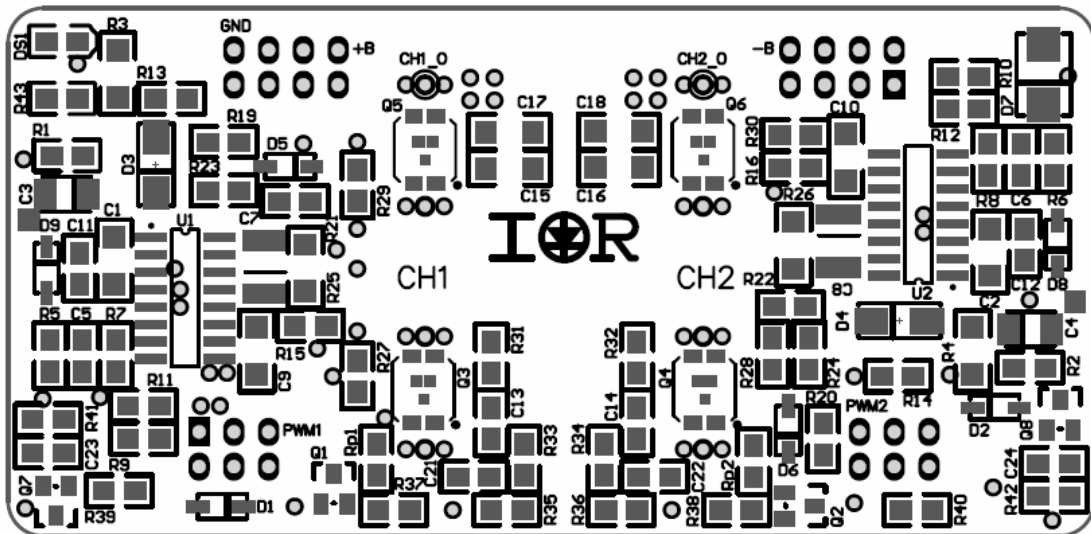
PCB Layout – Top-Side Solder-Mask and Silkscreen
